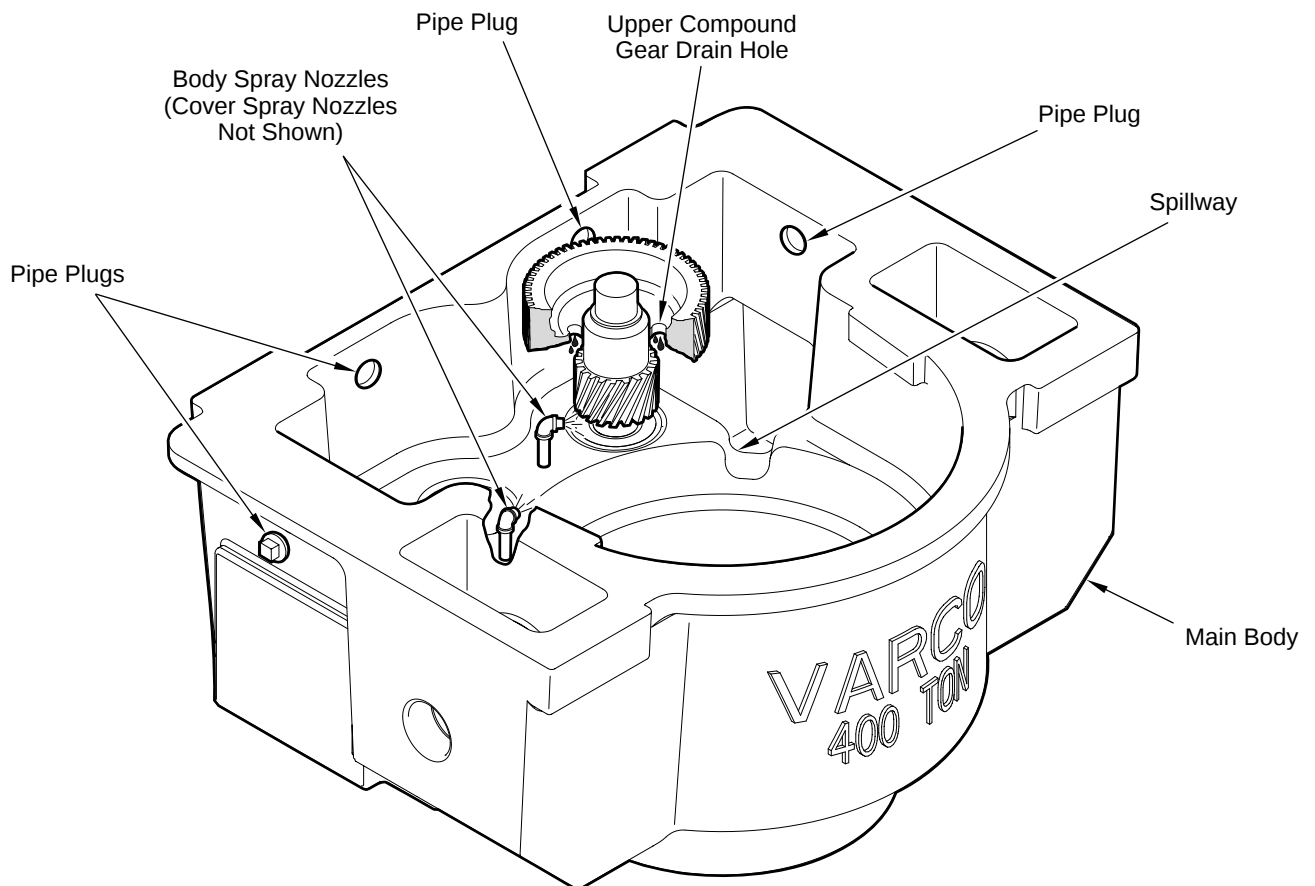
Inspecting the gearbox oil level
